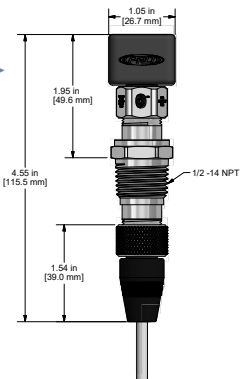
The accelerometer is fitted with an extension cable to remove communication barriers for the transmitter.
